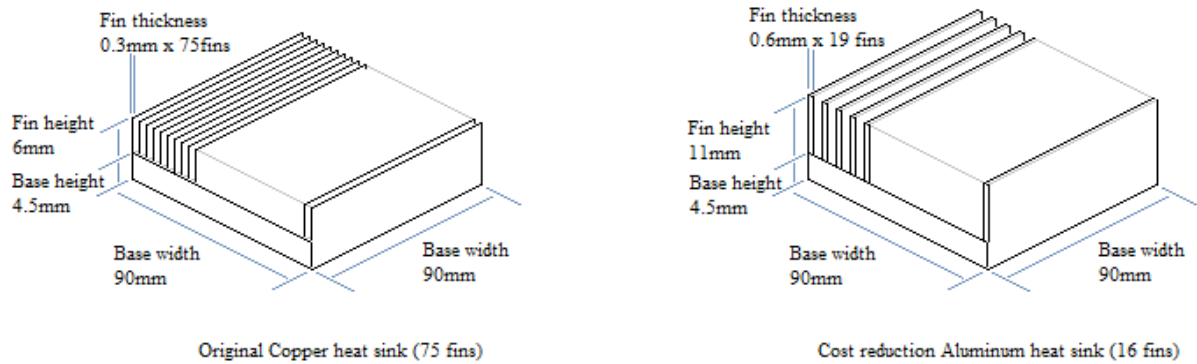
Schematic drawing of copper heat sink and ‘reduce cost’ aluminum heat sink
